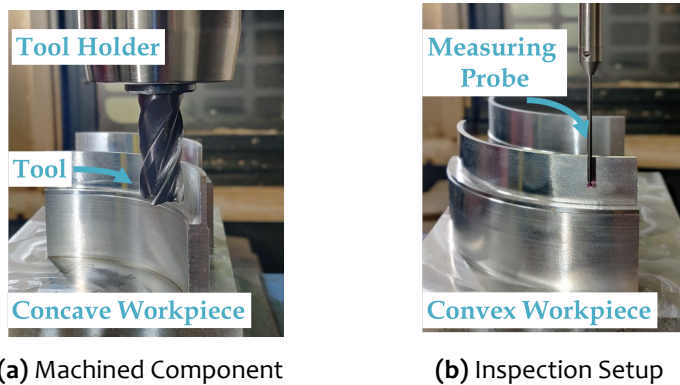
Machining and Inspection of Components after Finishing Pass
